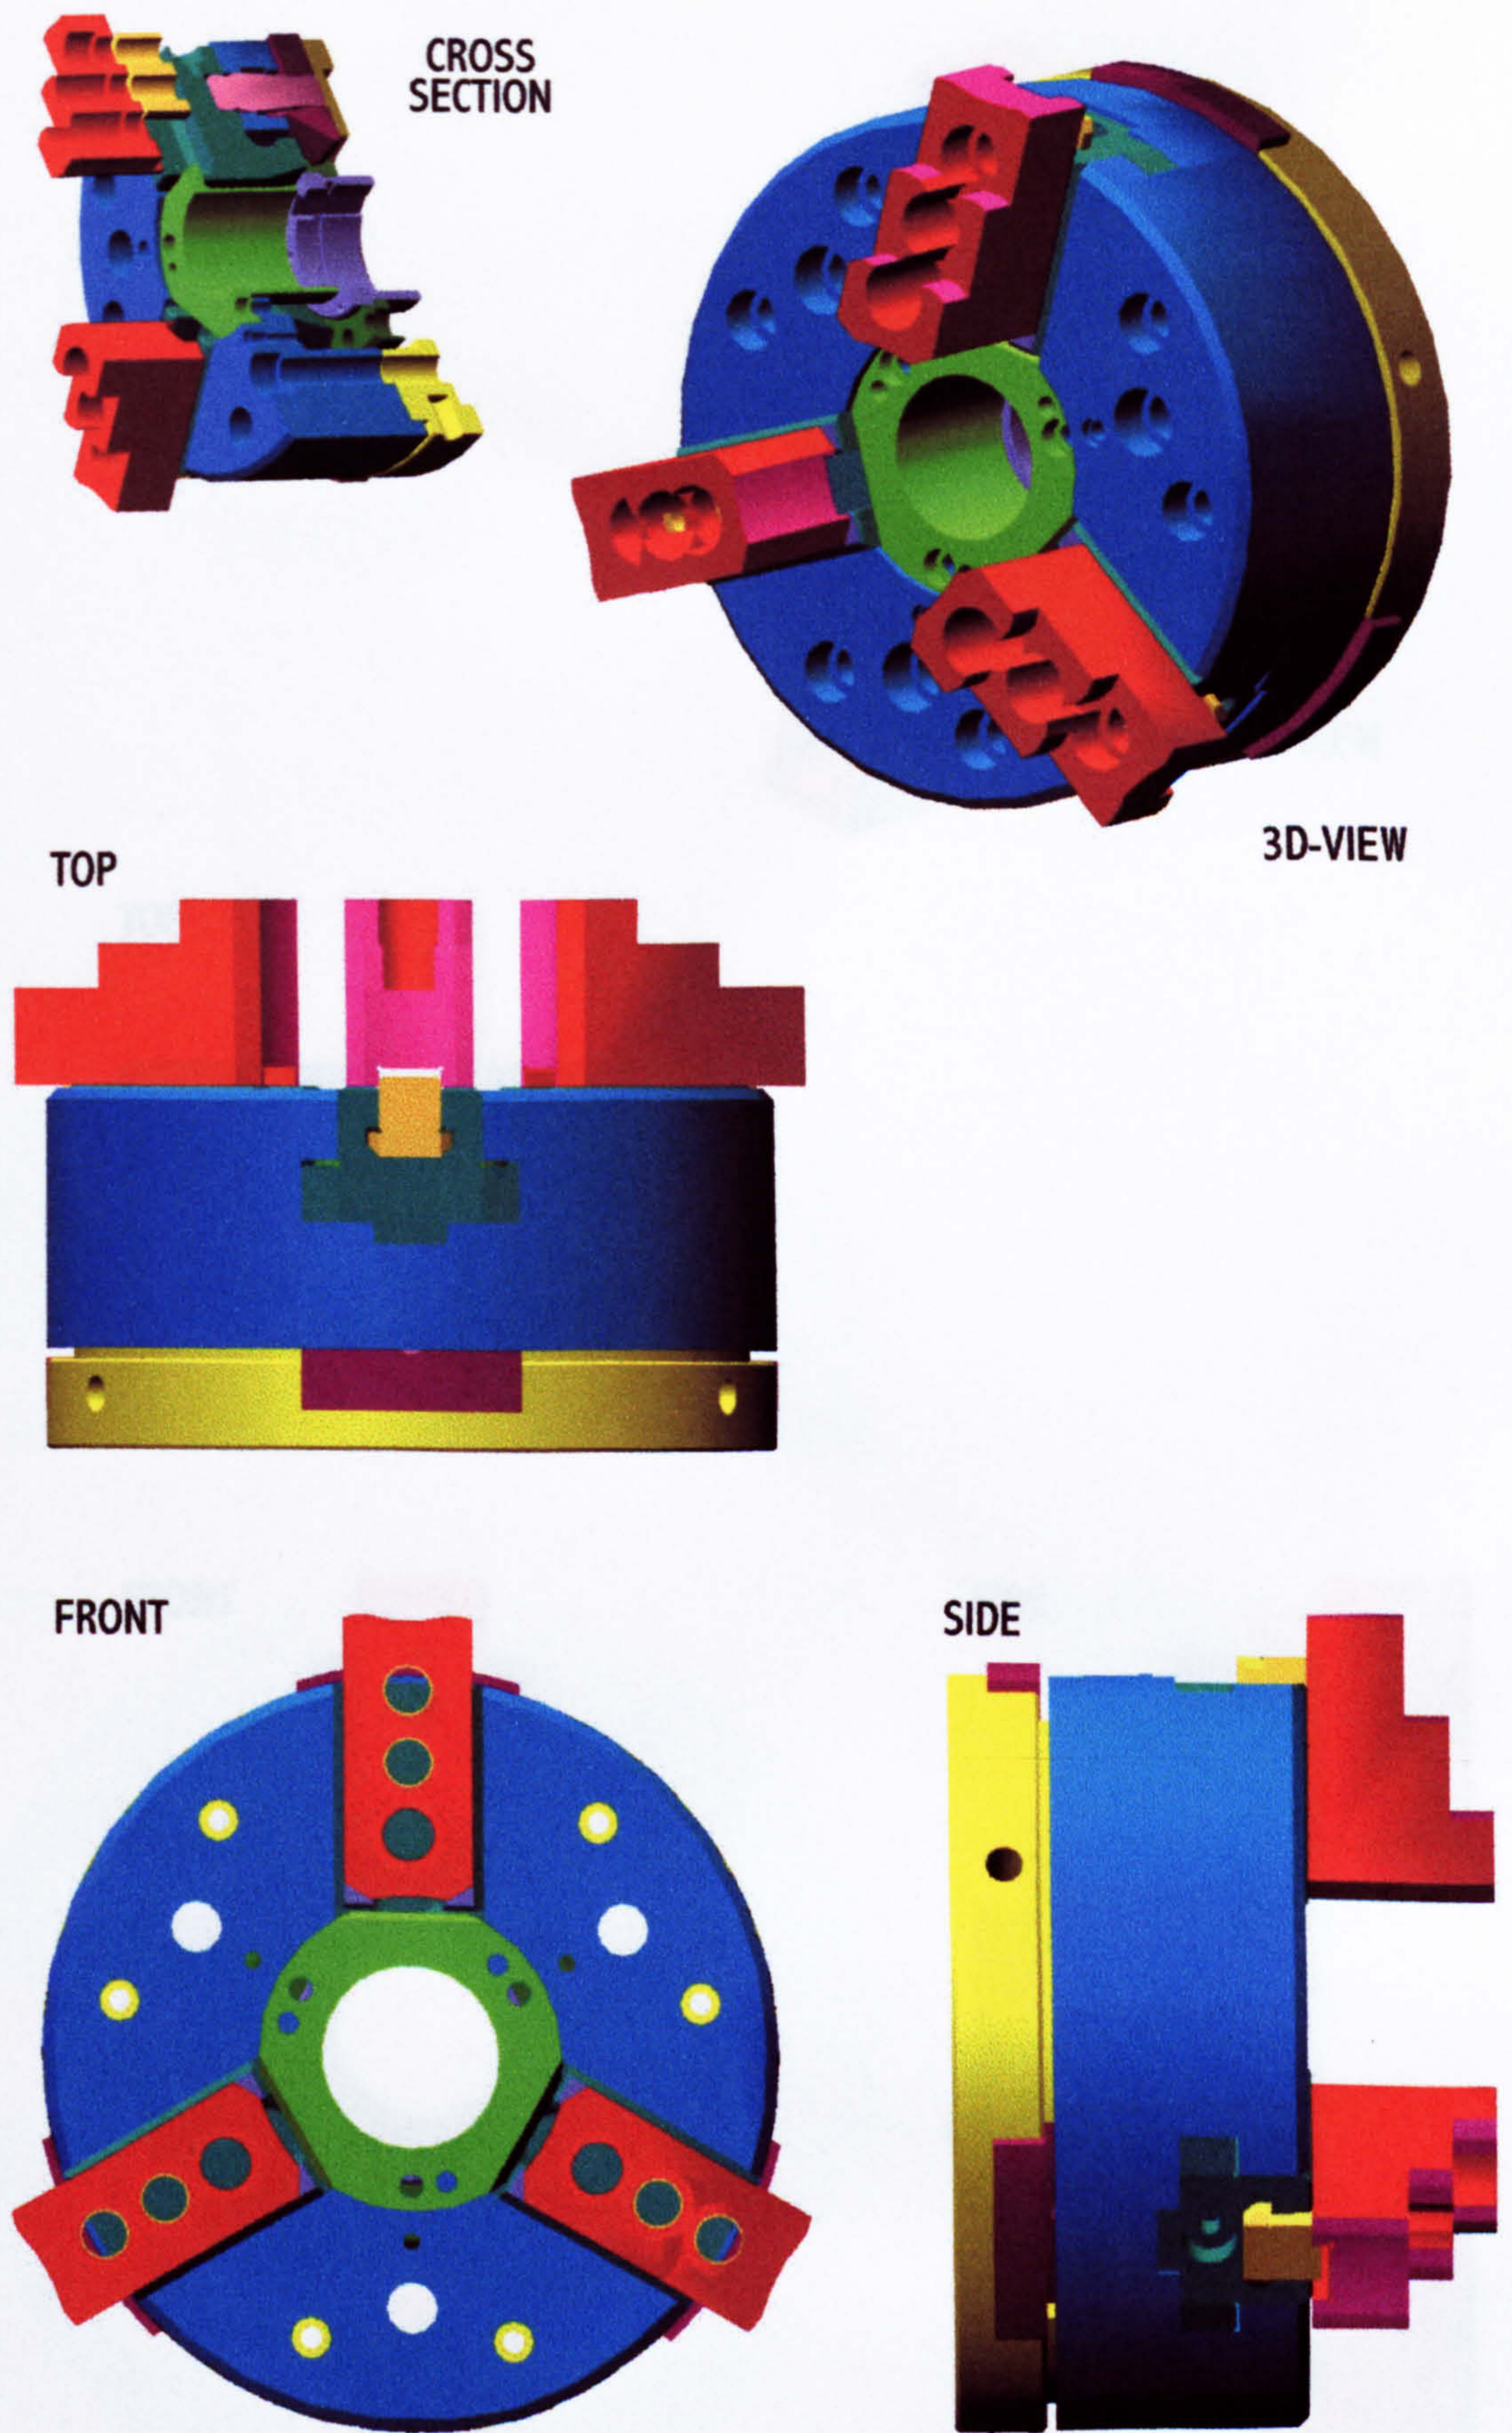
Assembly Views for the 3B200-PHNC Chuck
